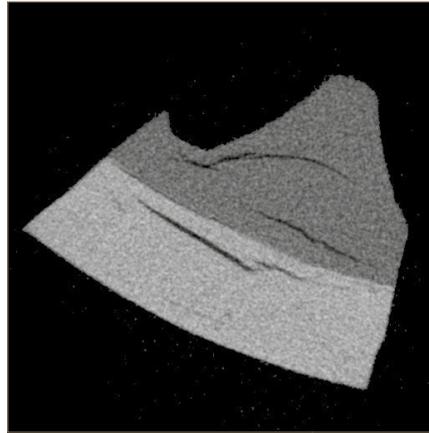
CT image of a gear tooth after debinding with internal cracks
